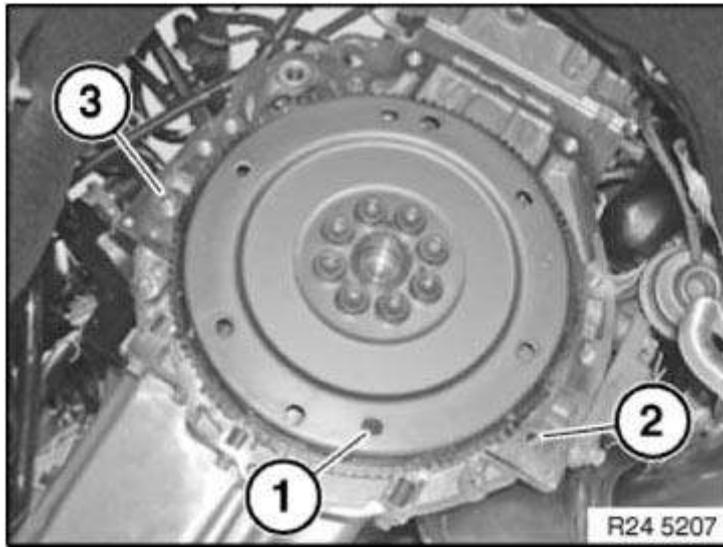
Identifying Driving Plate Bore Hole And Sleeves
